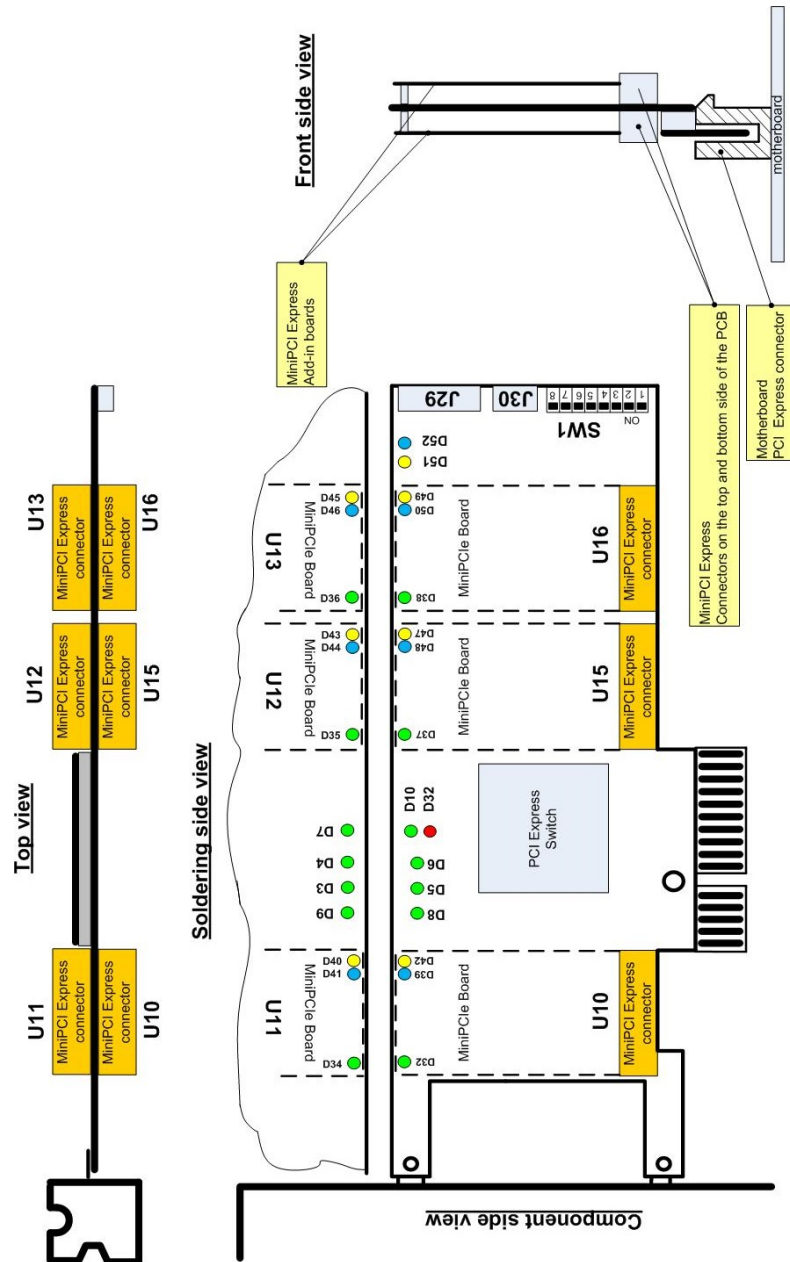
PCI Express Carrier Board for MiniPCle modules layout
